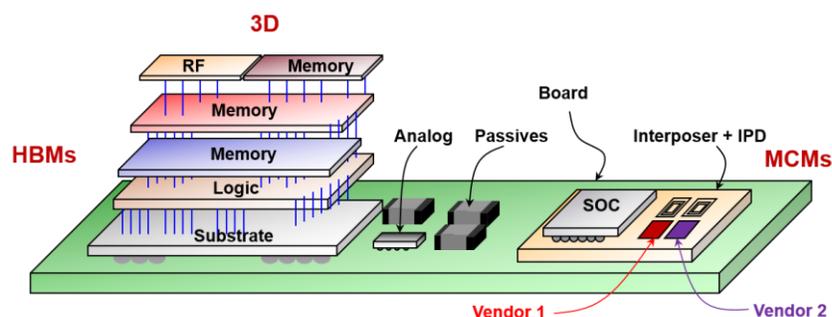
PCBA with Advanced Packaging and Multi-Chip Modules
